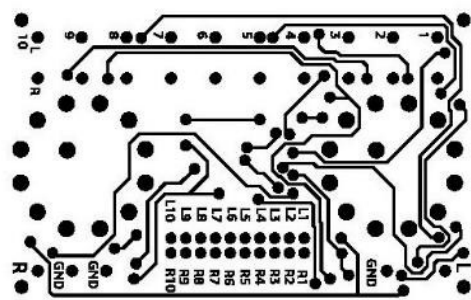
Oscilloscope Channel Selector PCB Mask Top
